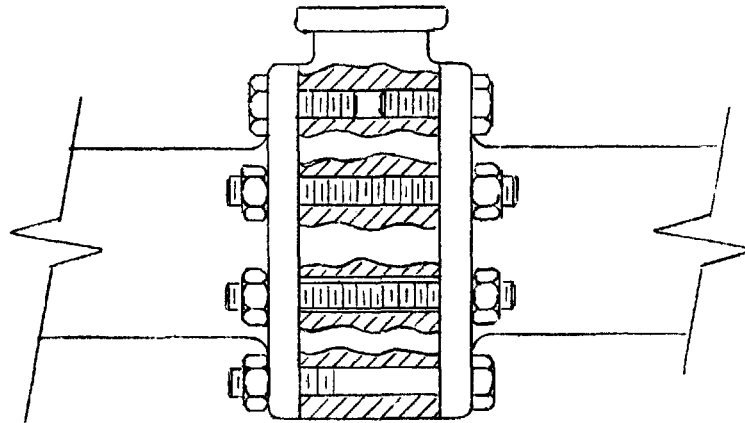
SINGLE FLANGED, BOLTING OPTIONS
